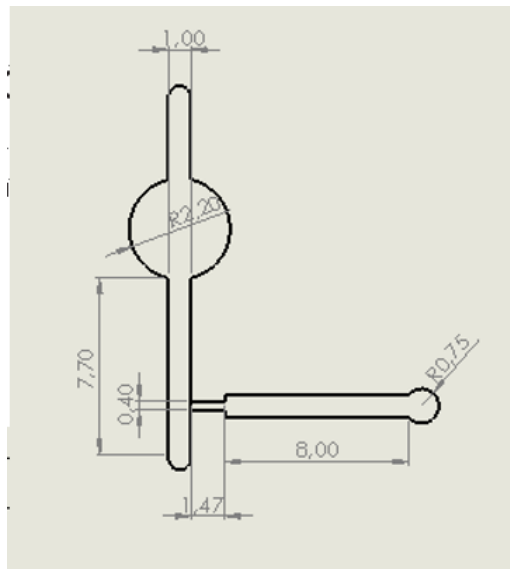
Drawing in SolidWorks of Zoom-in on Master Mould containing trigger valve structures
